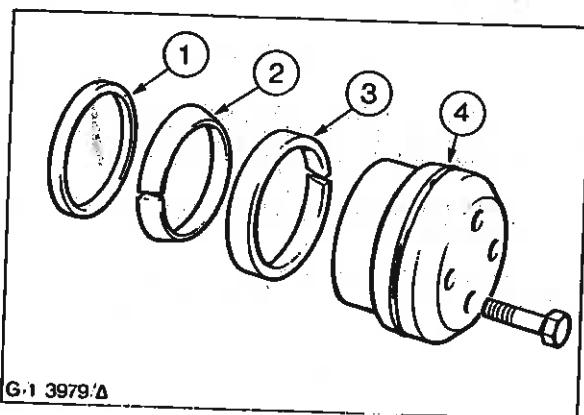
Crankshaft Pulley Retaining Components - 6 Cylinder Engines (Ringfeder Locking Mechanism)
